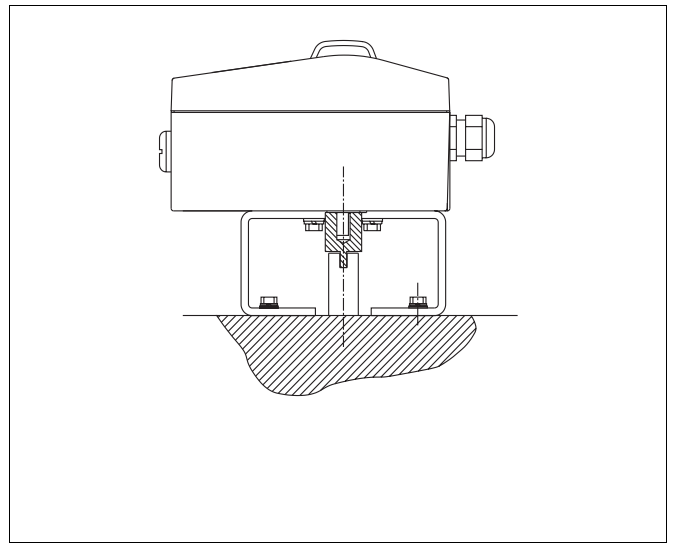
Mounting to rotary actuators to VDI/VDE 3845
